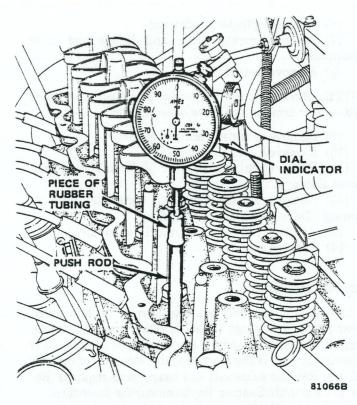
B-55 Cam Lobe Lift Measurement and Valve Timing
